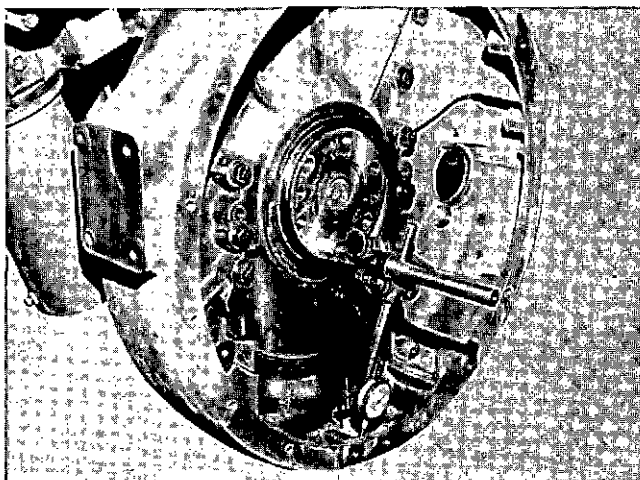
, V414172. Indicating flywheel housing bore
